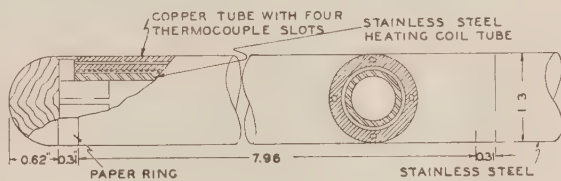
DETAILS OF COPPER HEATING SPECIMEN
